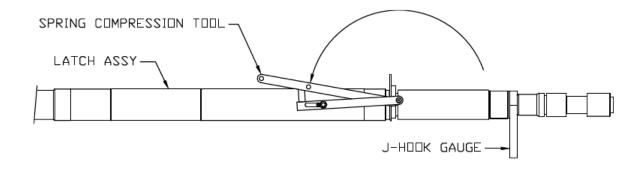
LATCH PISTON SPRING COMPRESSION
